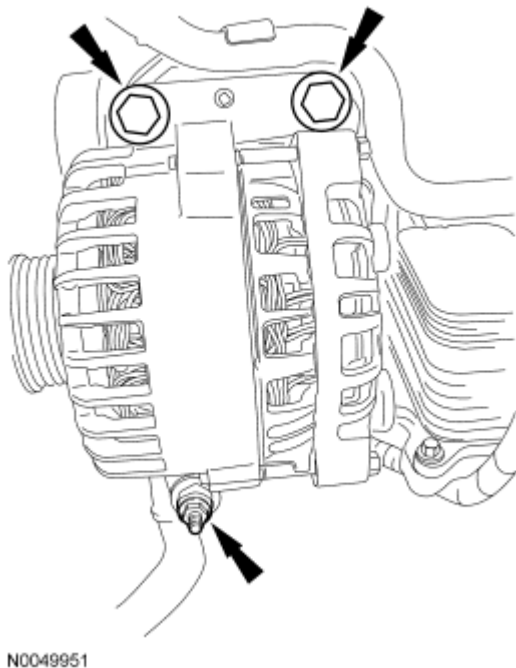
Locating Stud Bolt, Bolts & Alternator
